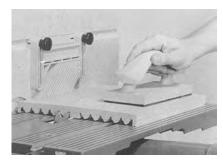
Surface cuts are done in routine fashion; but be careful with settings so cut spacing will be correct. The feather board helps to keep the work flat on the table.
